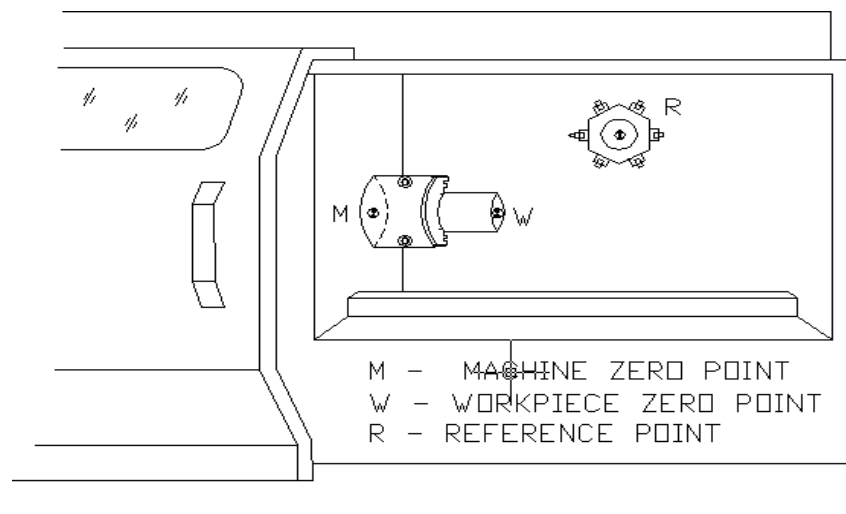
CNC Machine Zero, Work piece Zero and Reference Point
